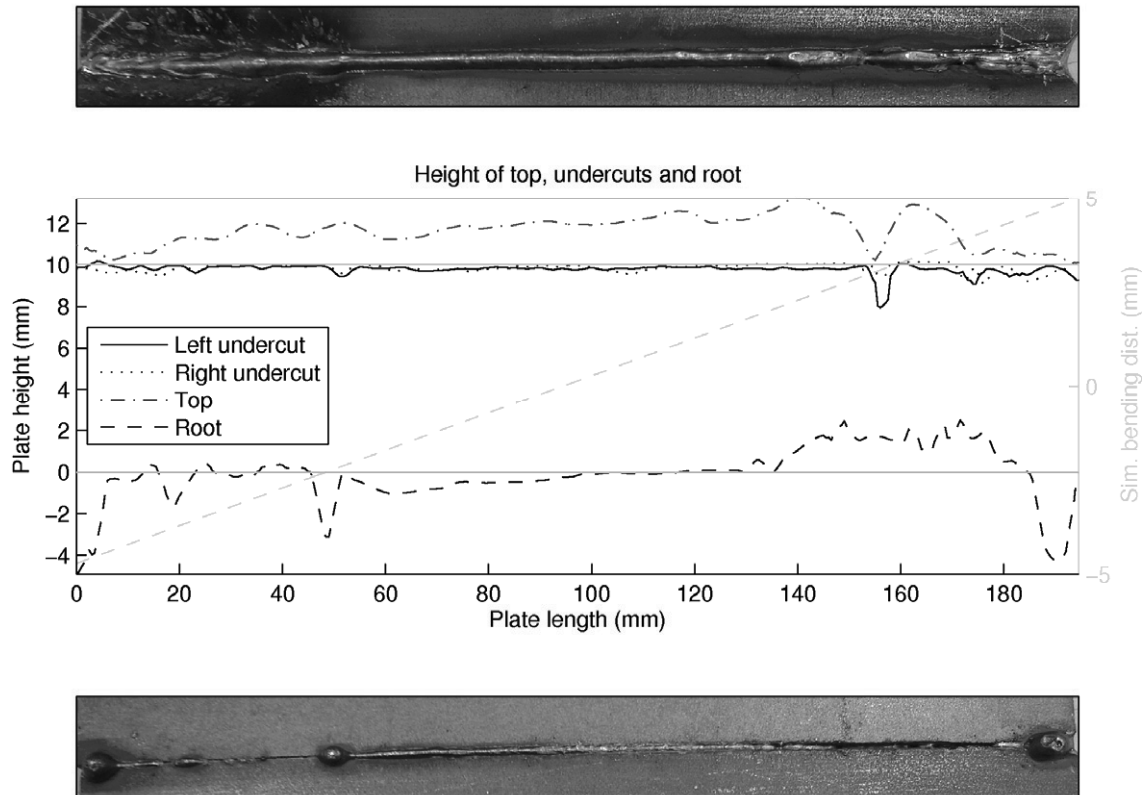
Photographs and surface profiles of the top and bottom of the weld made with the workpiece too close (towards the left and too far away (towards the right).
